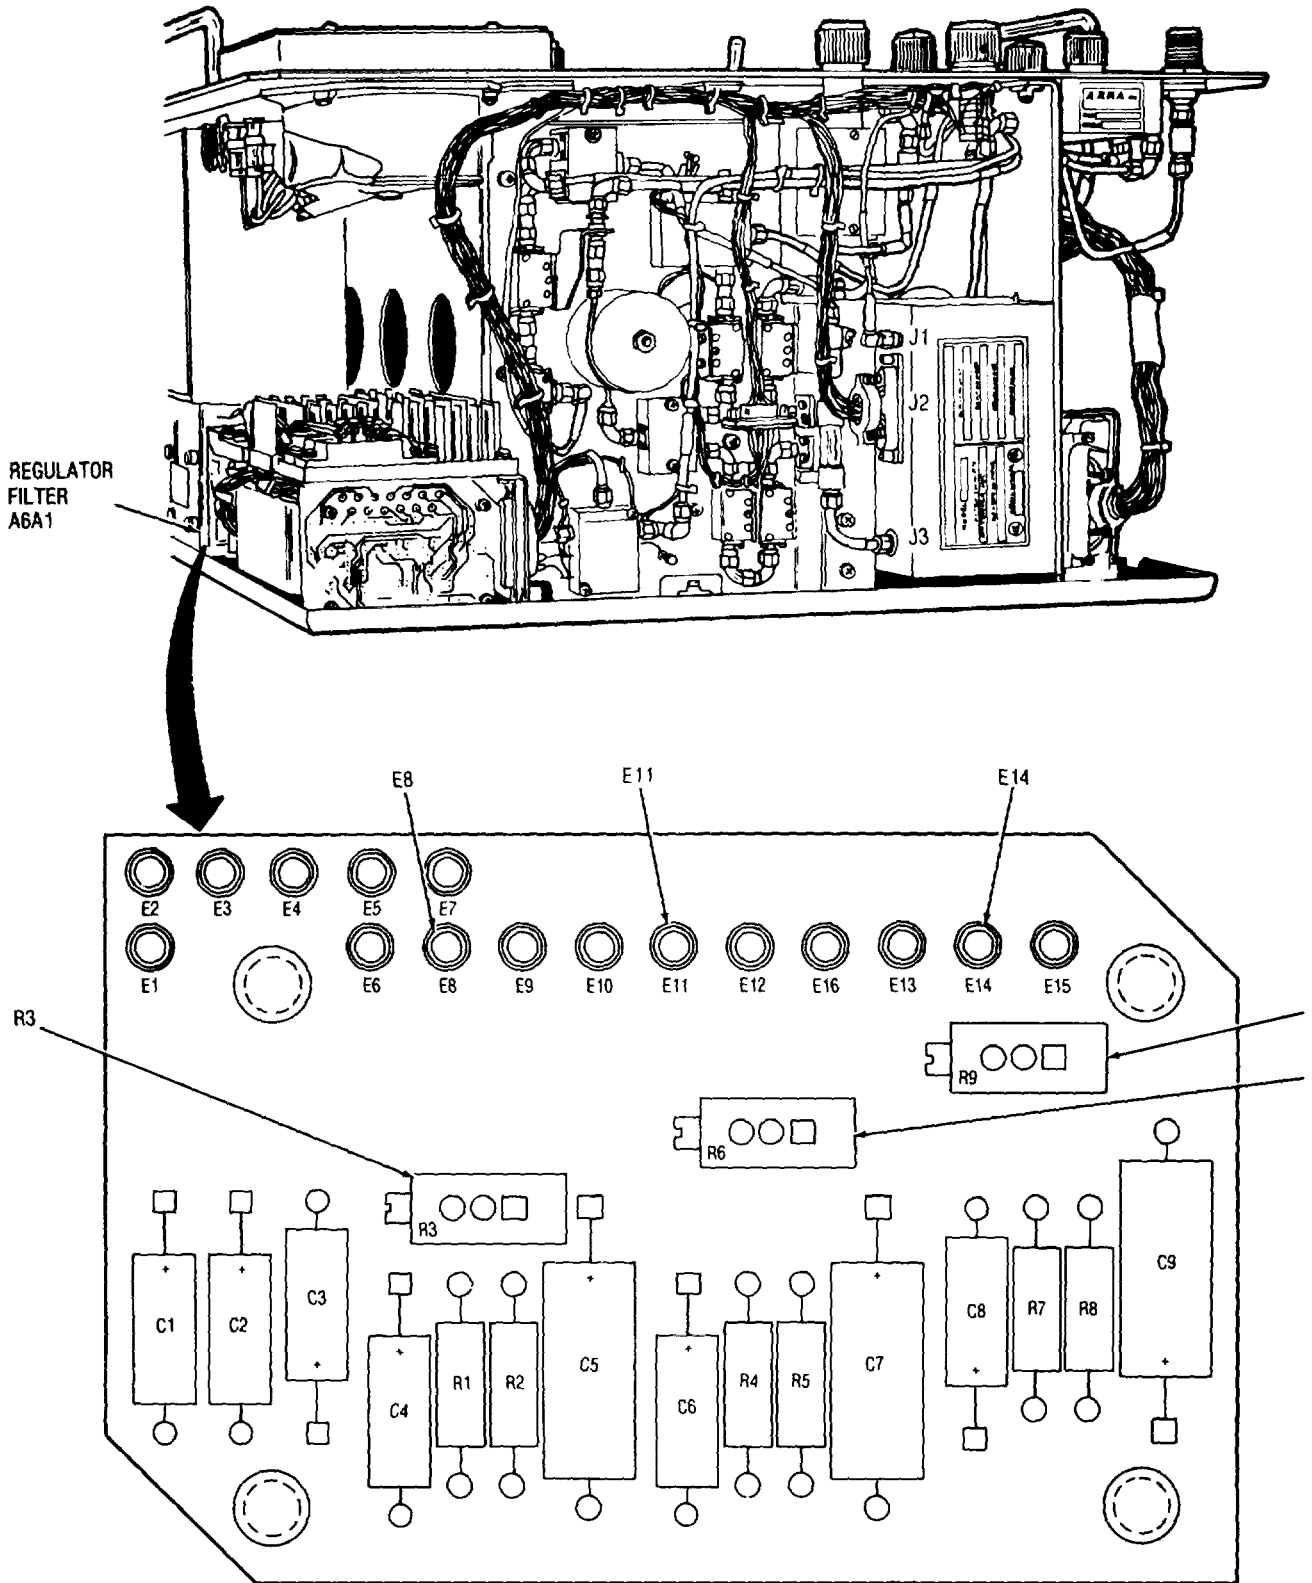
Regulator Filter A6A1 Parts Locations.
